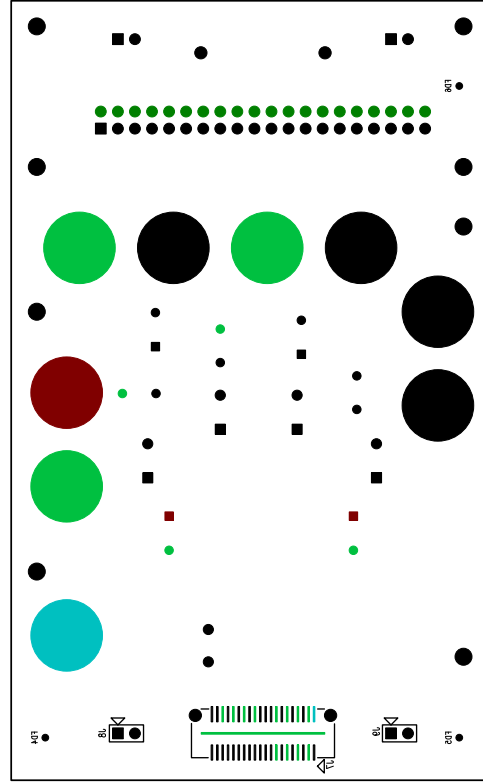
CRD4525-Q21 Board Silkscreen Bottom
